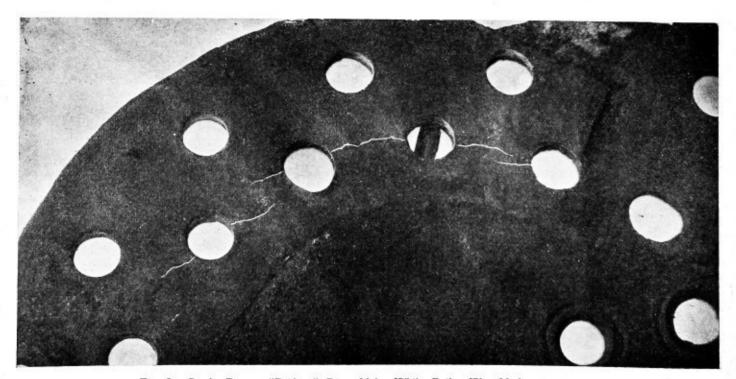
Cracks Due to "Drifting" Rivet Holes While Boiler Was Under Construction
